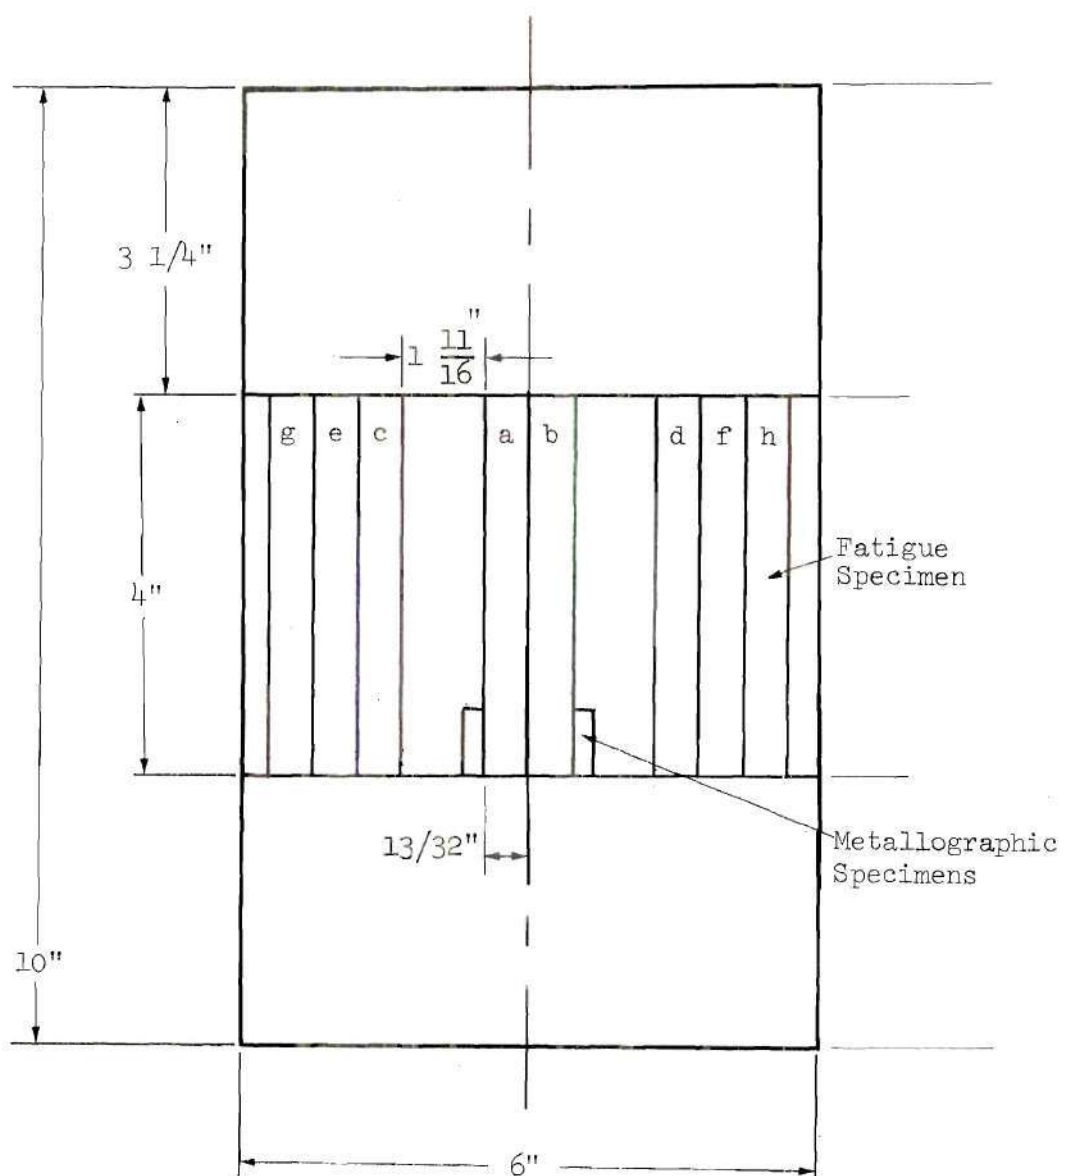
Location of Test Samples Relative to the Mill Condition Plate.
